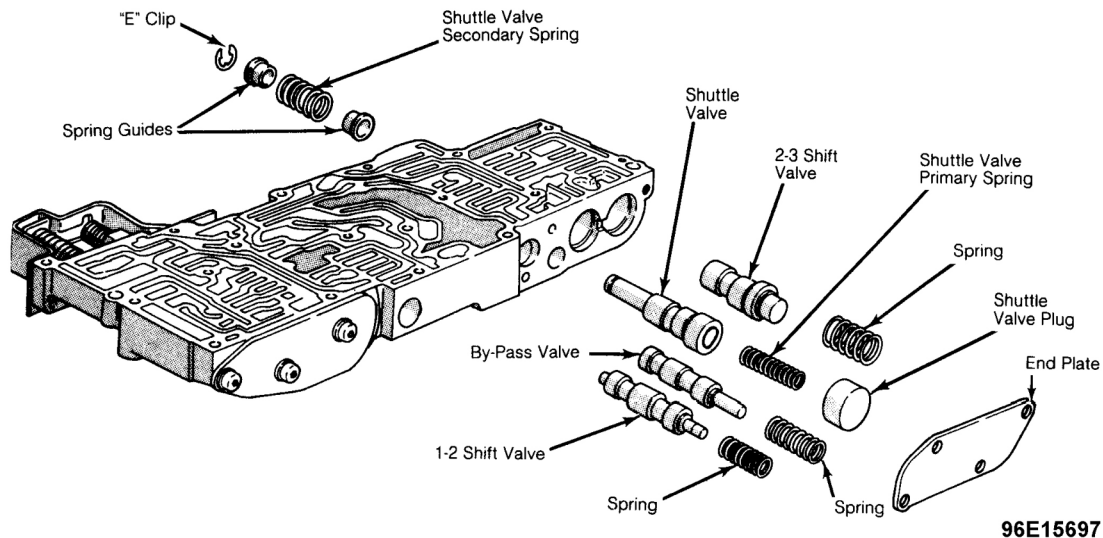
Exploded View of Shuttle Valve & Shift Valve Trains
